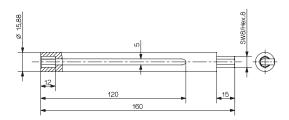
Mounting key for deep mounting bores Type 1300A41
